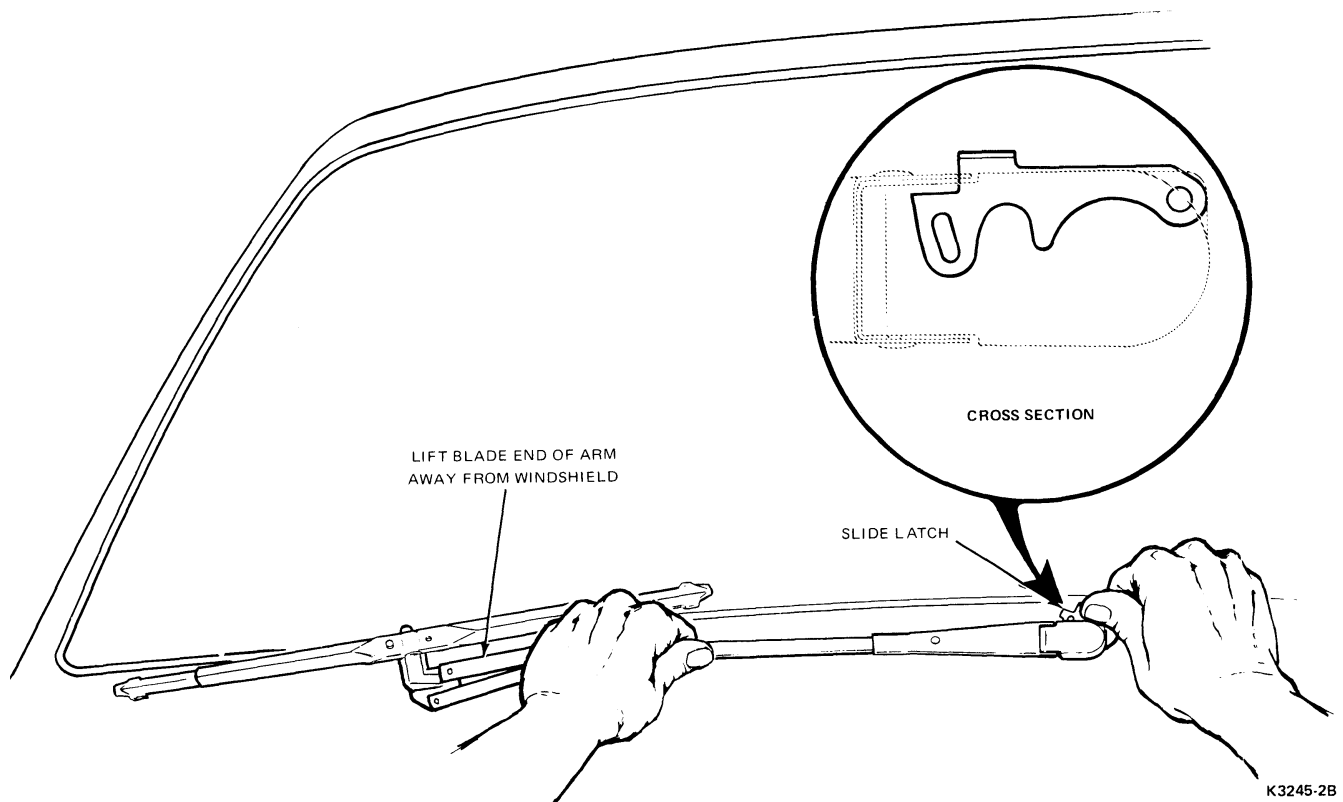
Wiper Arm Installation—E-100—E-350, F-100—F-350 and Bronco
